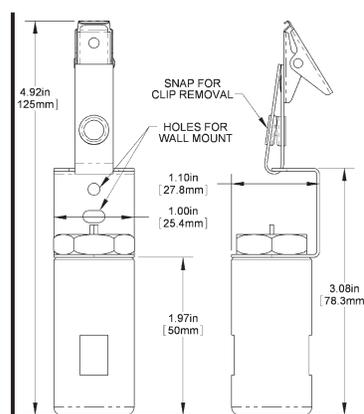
BB2, 2" & 4" Buffer w/Plastic Threaded Fitting
